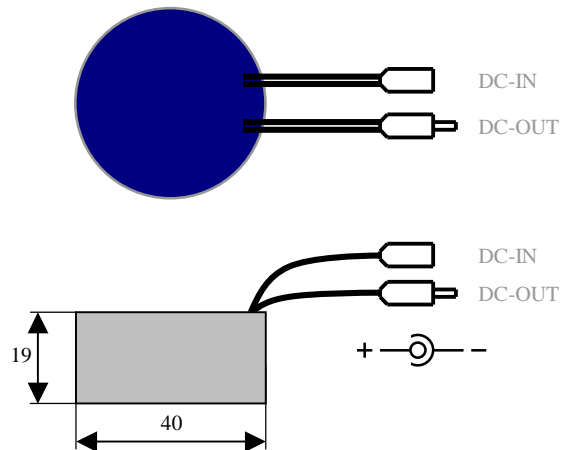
Dimensions (mm) sensor with DC cables and mounting base
